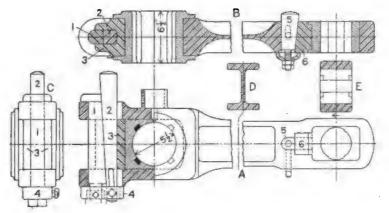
Rod for Express Locomotive, cross-head in Fig. 289. Scale 1 to 12.
